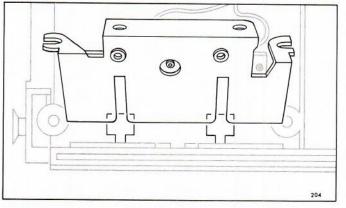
SWITCH CONTACT ASSEMBLY
